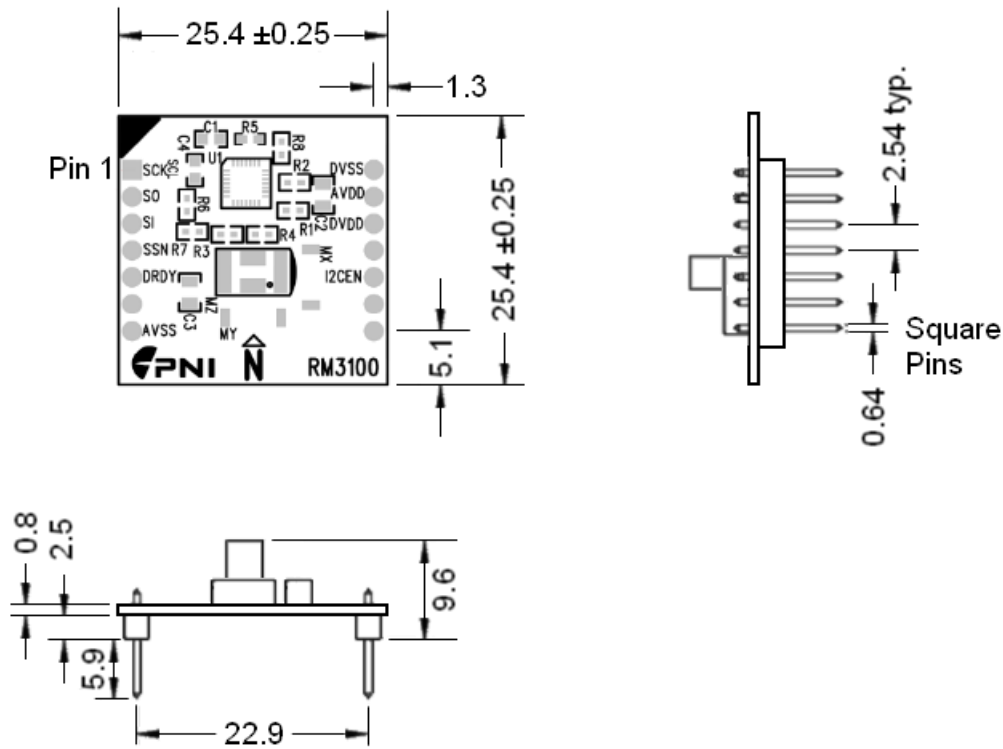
RM3100 Evaluation Board Mechanical Drawing
